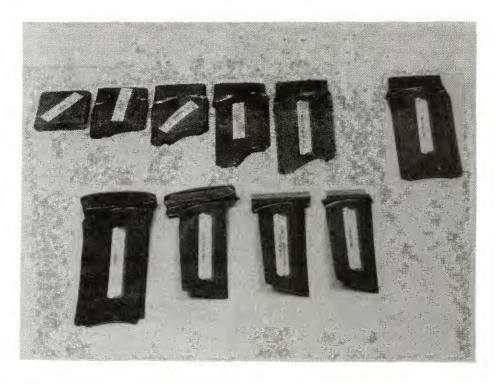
Some Stages in Cold Roll-Forging of Compressor Blade in 17-4PH Steel (#76-2679)
